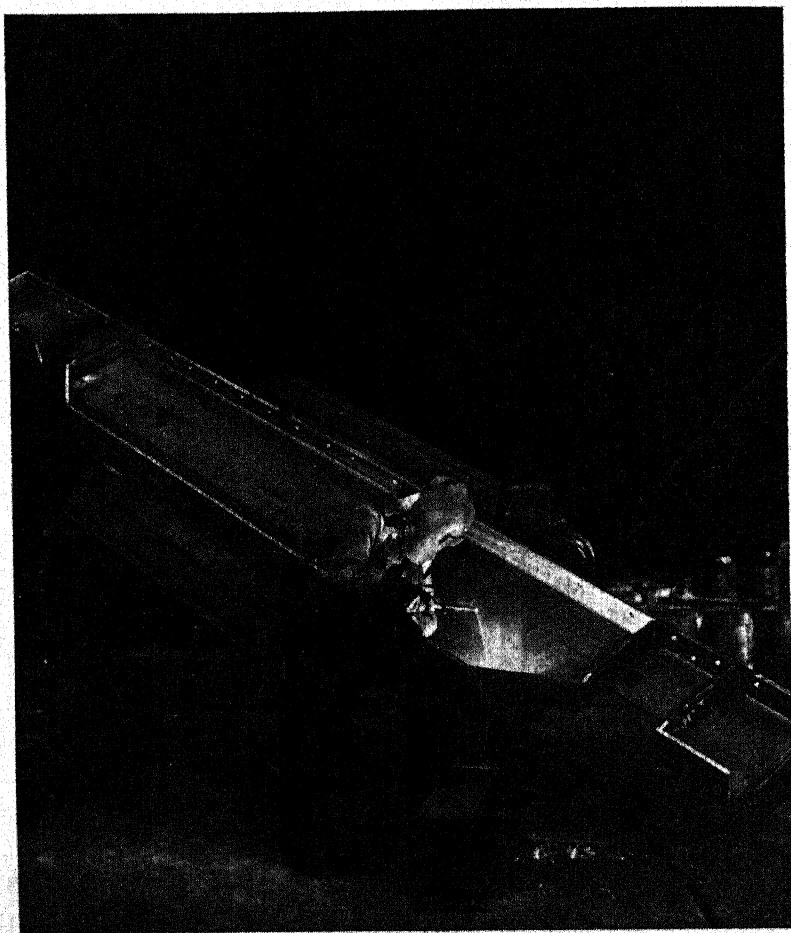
No successful weldery can afford not to have suitable equipment for positioning work for welding.
